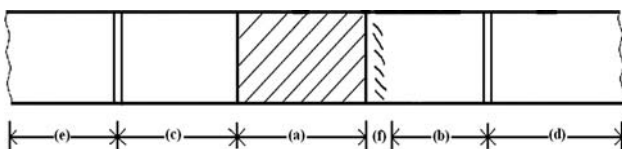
Microhardness values in different zones of weld joint of specimen containing cracks are (a) weld zone 350–360 HV, (b) HAZ 360–370 HV, (c) HAZ on opposite side of weld bead 360–370 HV, (d) base metal 345–355 HV, (e) base metal on opposite side of weld bead 350–360 HV and (f) region containing cracks 380–390 HV
